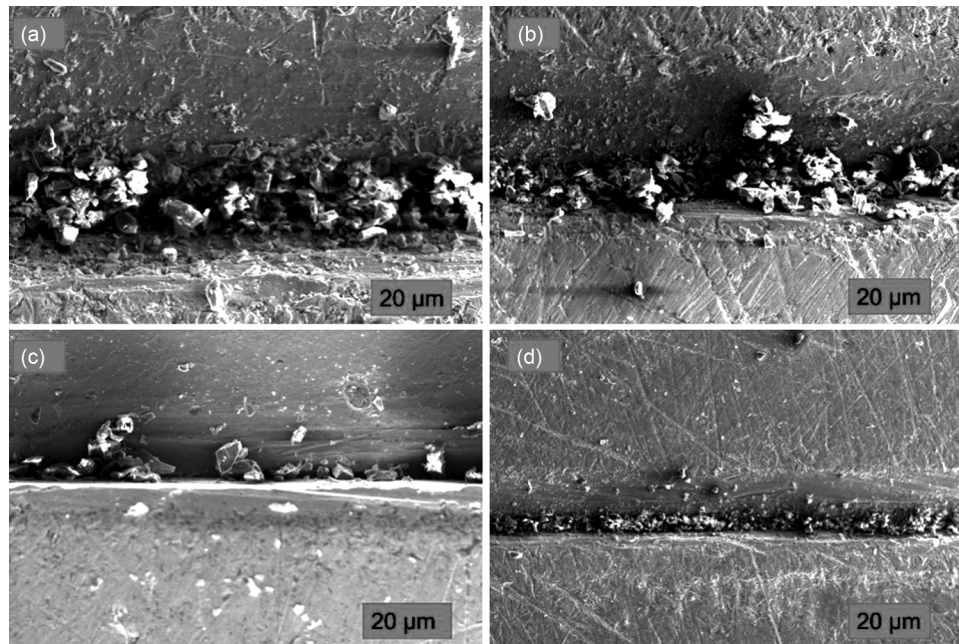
SEM image of welded and heat-treated welded sample (a) & (b) welded sample, (c) & (d) heat treated welded sample.
